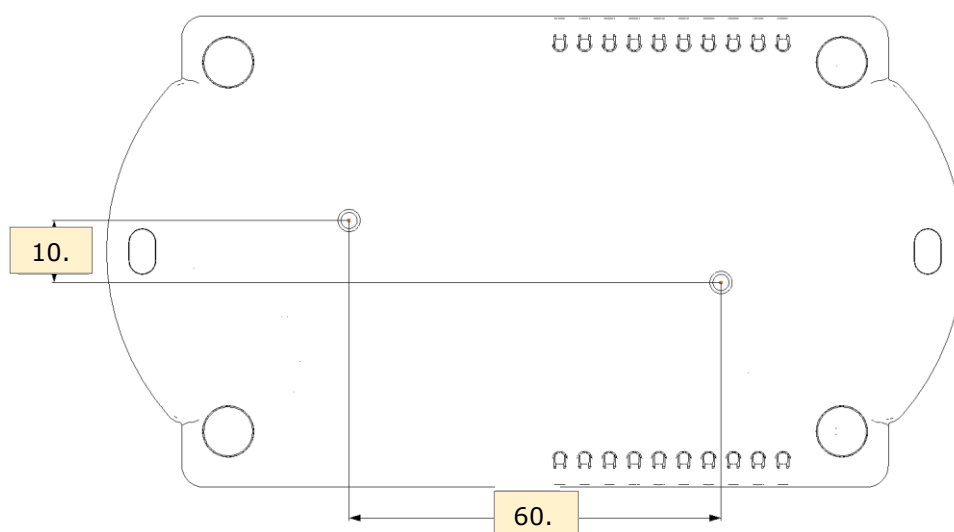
Modbus Trailing Edge Light Dimmer Dimension – Bottom View
